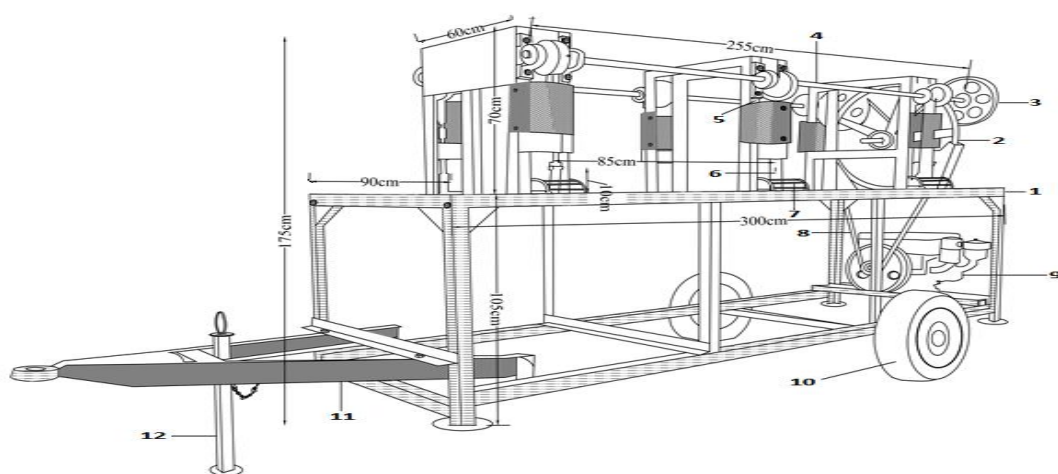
Bud chip/bud node scooping machine (Basic parts; 1- Main frame; 2- Large pulley; 3- Small pulley; 4- Shaft/beam; 5- Cam; 6- Cutter; 7- Protecting cover; 8- Belt; 9- Peter engine; 10- Wheel; 11- V-shaped hook; 12- Stand) (Patent submitted; Intellectual Property Organization Karachi Pakistan; Electronic Publication of Patents Journal under The Patents (Amendments) Act, 2016; (Patent Number 143641)
